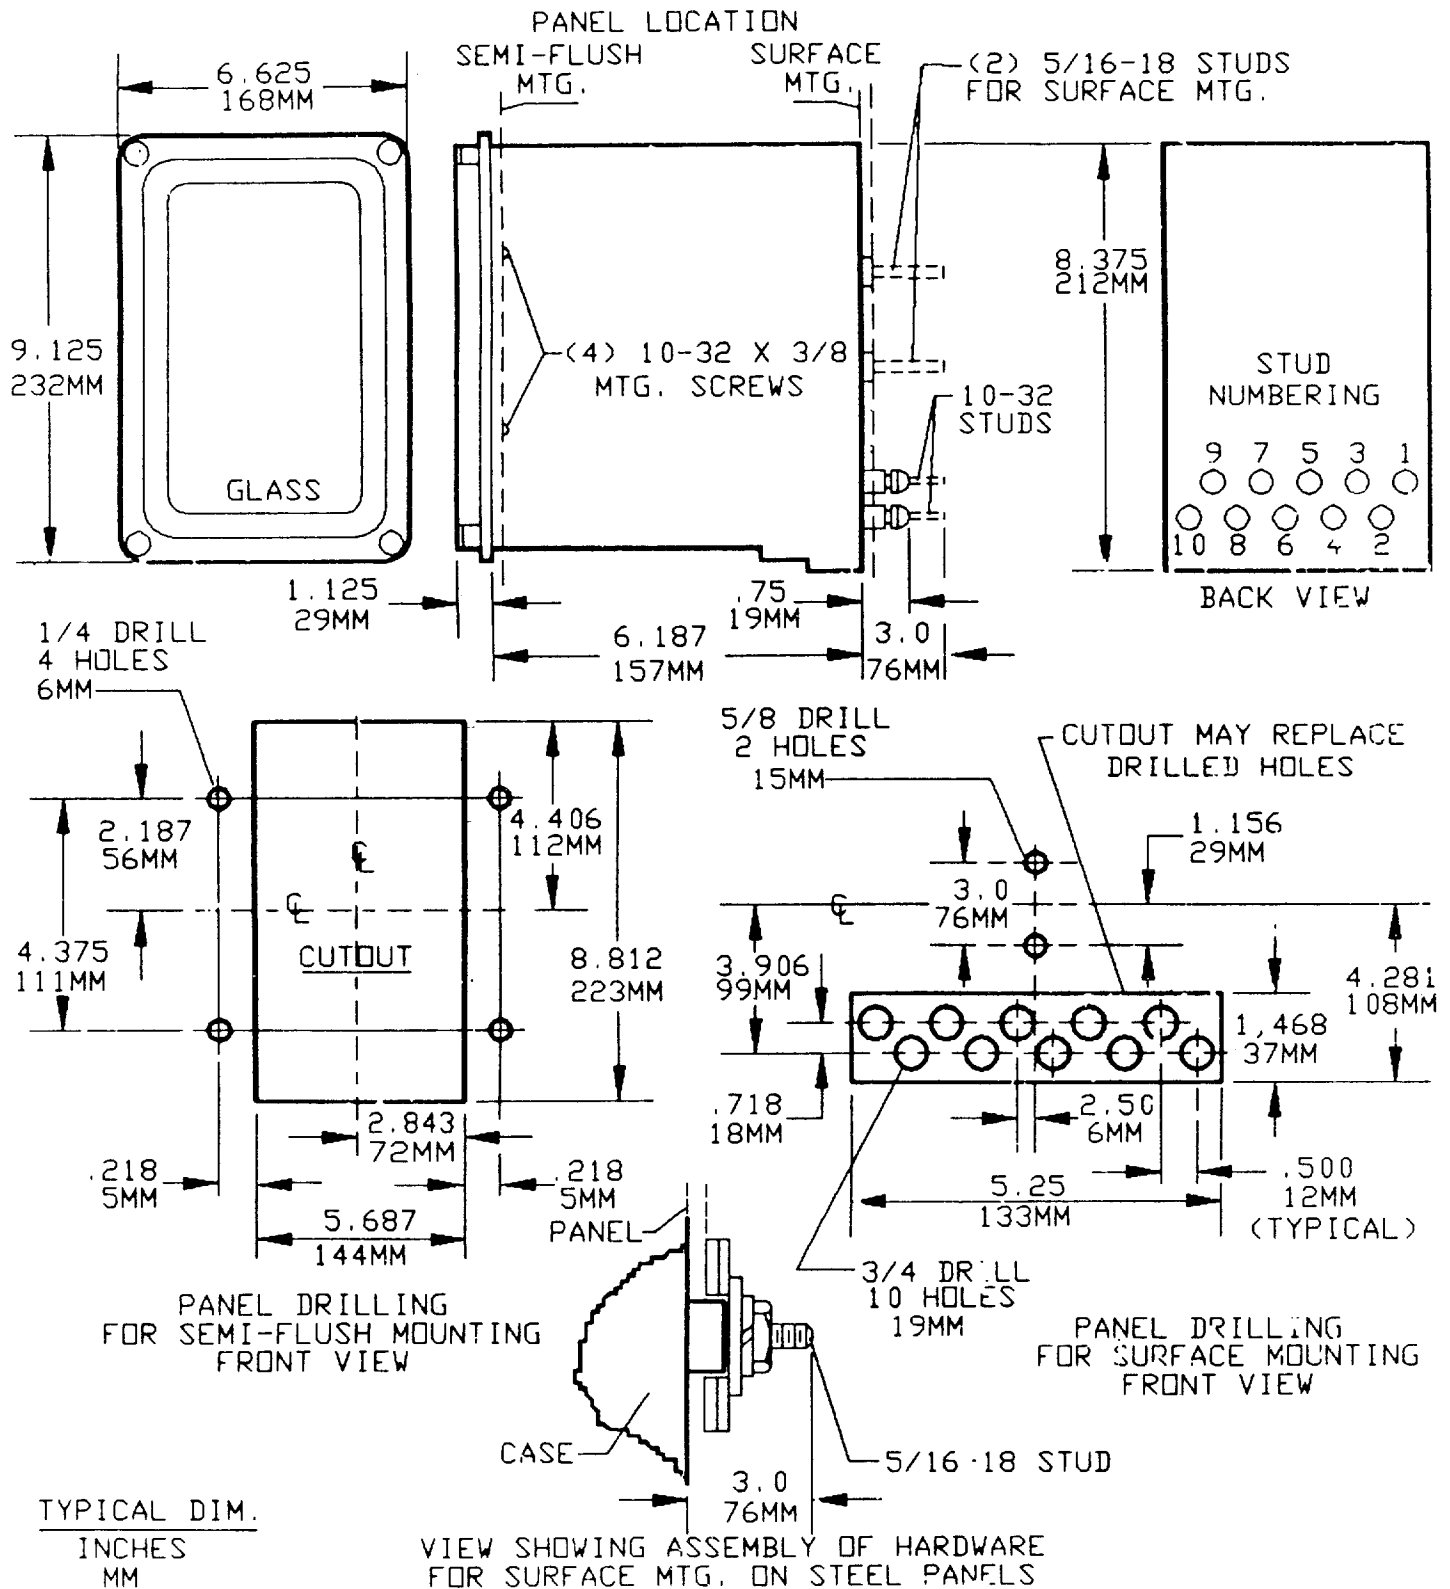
(K-6209271[8]) Outline and Panel Drilling Dimensions for Type IJS Relay
